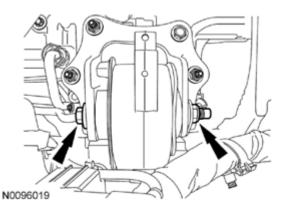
Locating Transaxle Mount Through Bolt And Nut Courtesy of FORD MOTOR CO.
